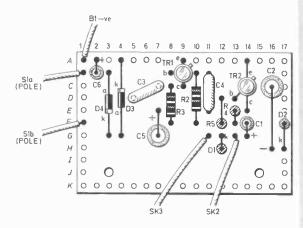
Layout of components on the rear of the front panel and interwiring details to the circuit board.
